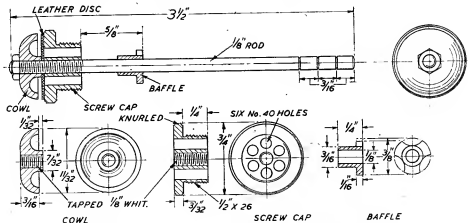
Combined crankcase breather, oil filler and dipstick.
